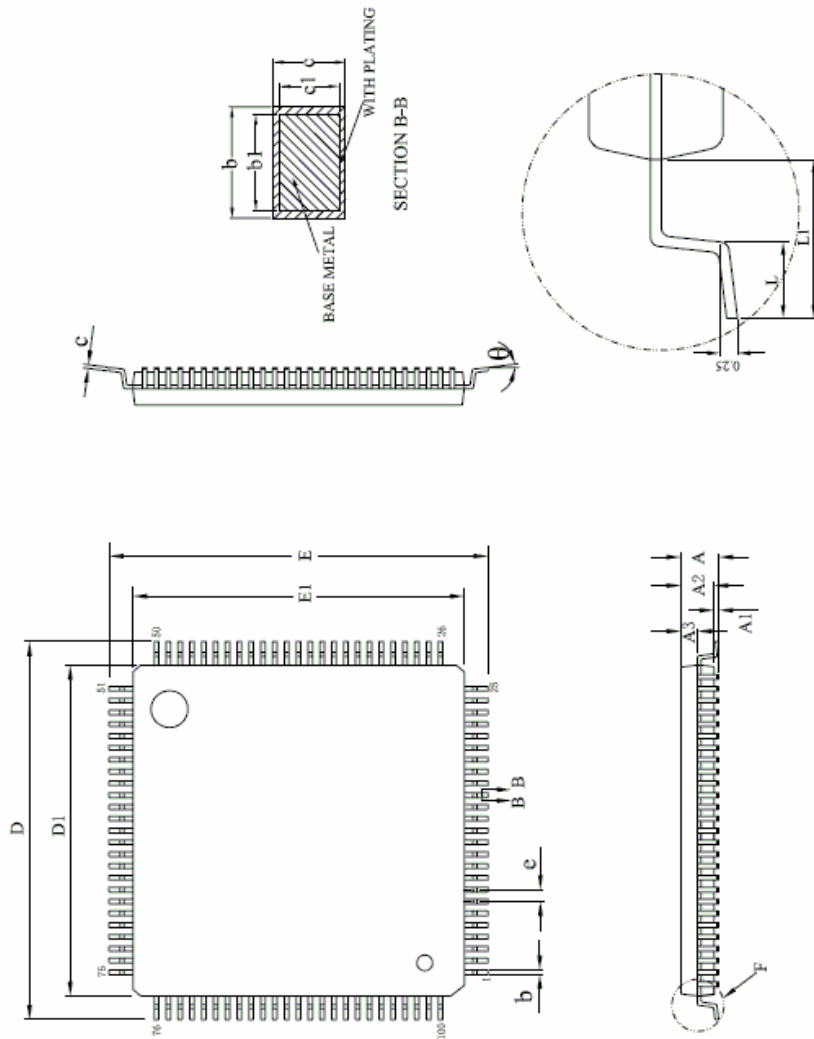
LQFP100-14x14mm Package Dimension Parameter
